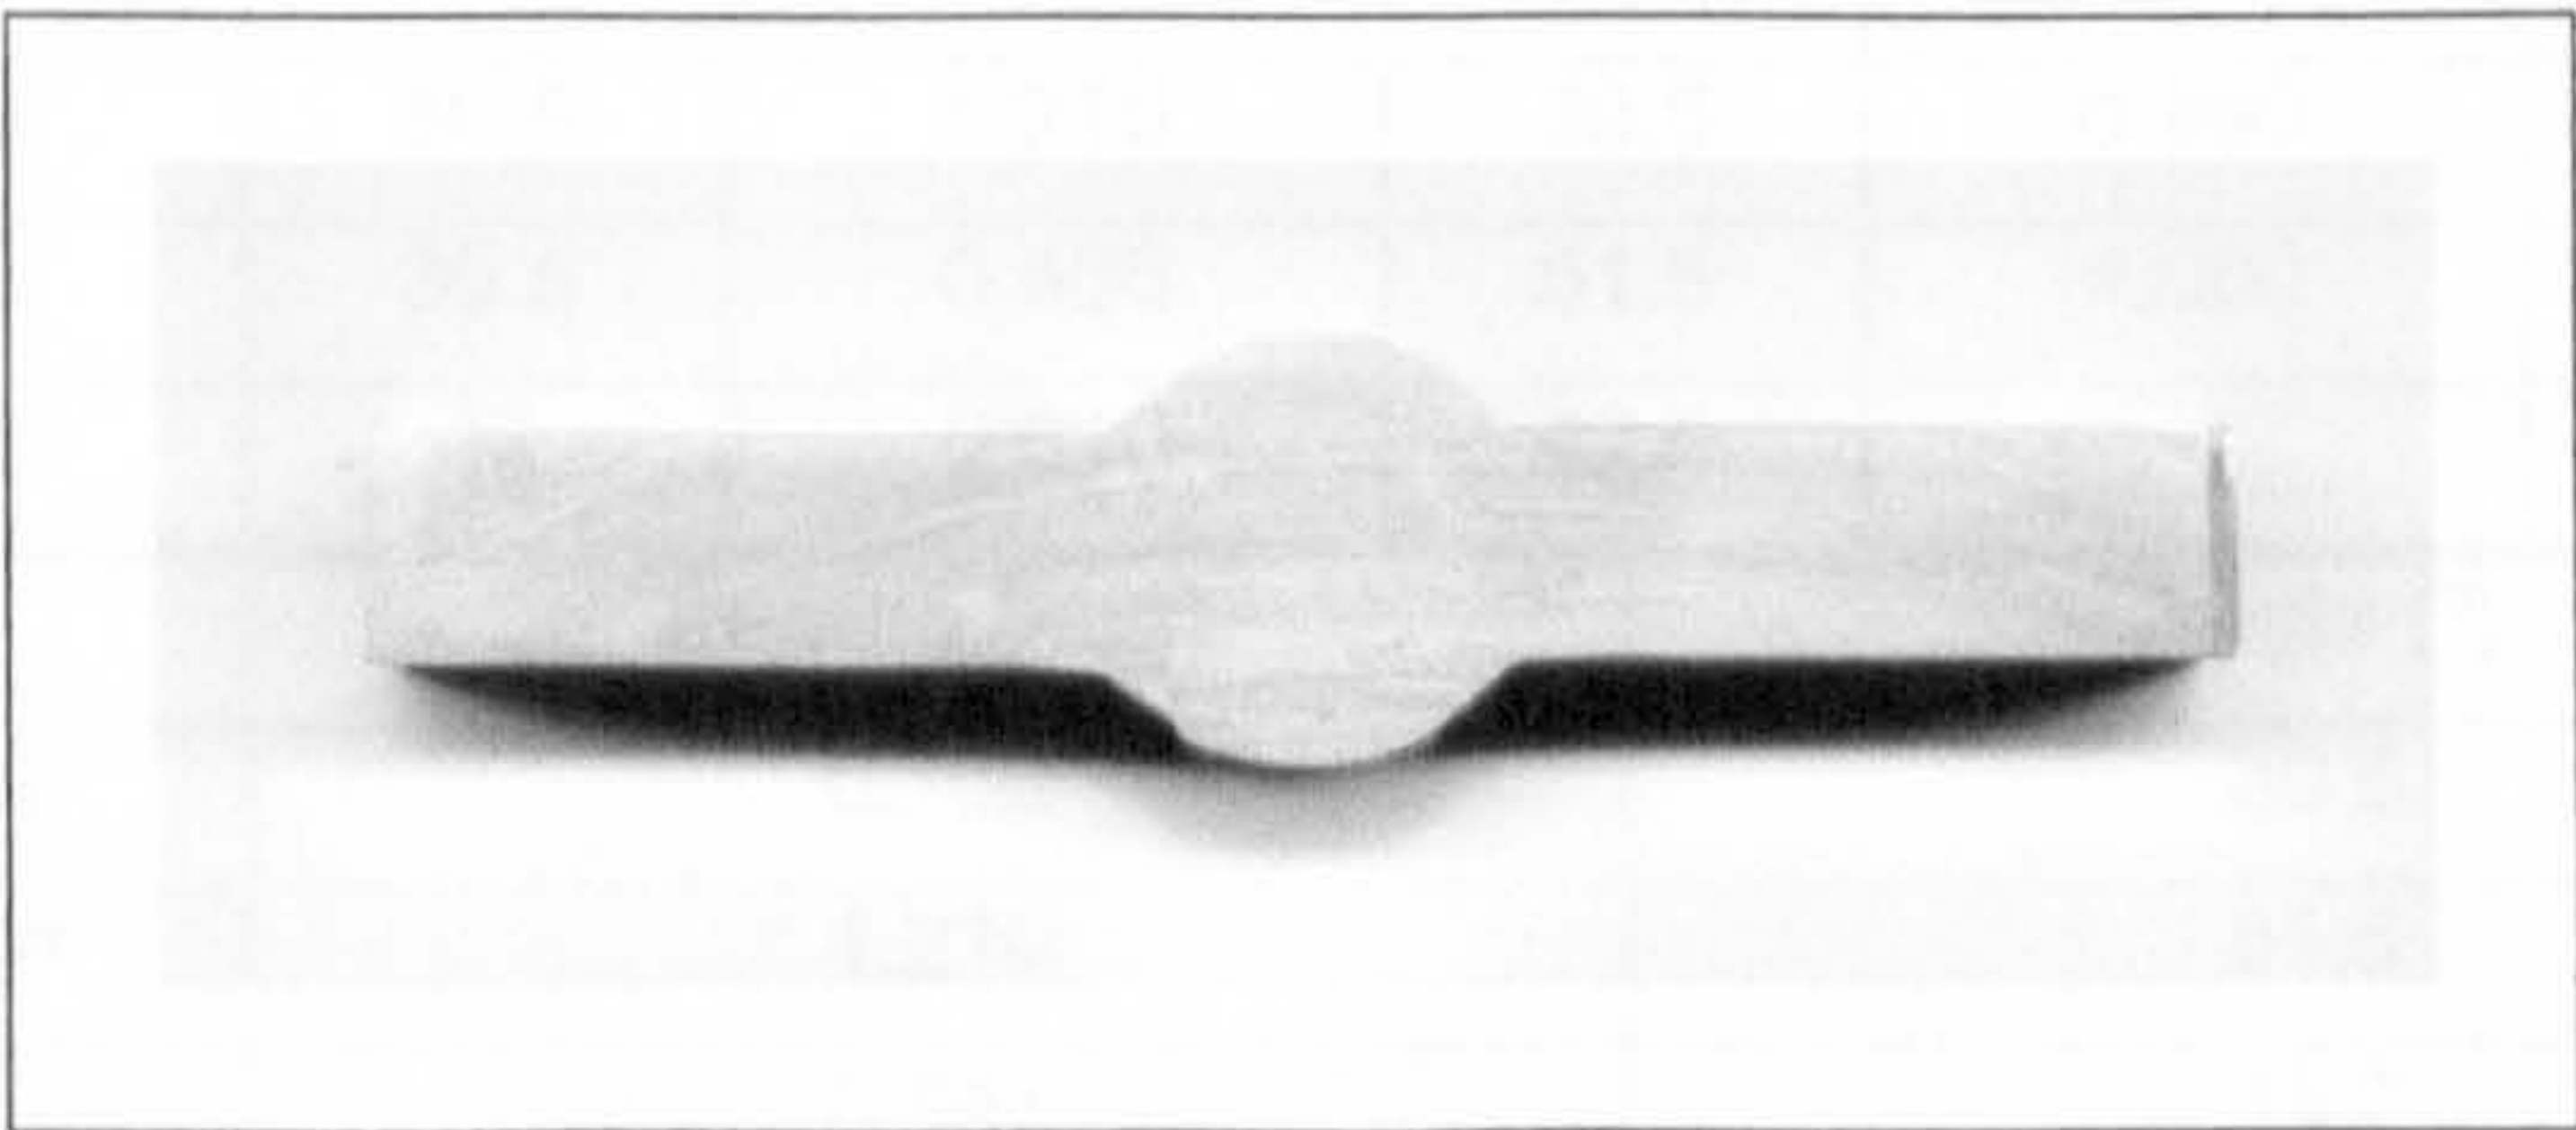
MIG HI weld bead geometry, 1st weld pass at the bottom (plate thickness 8 mm).
